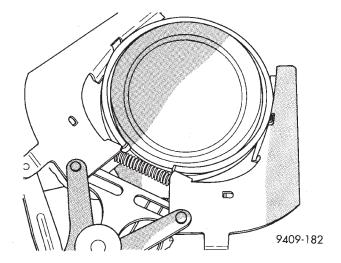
Piston Rings—Removing and Installing PISTON RINGS—INSTALLATION
